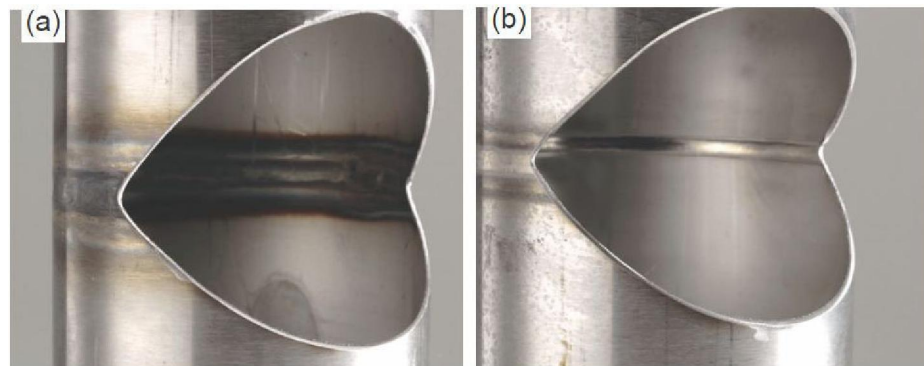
(a) Manual welded process tube (b) Orbital welded process tube [51]
